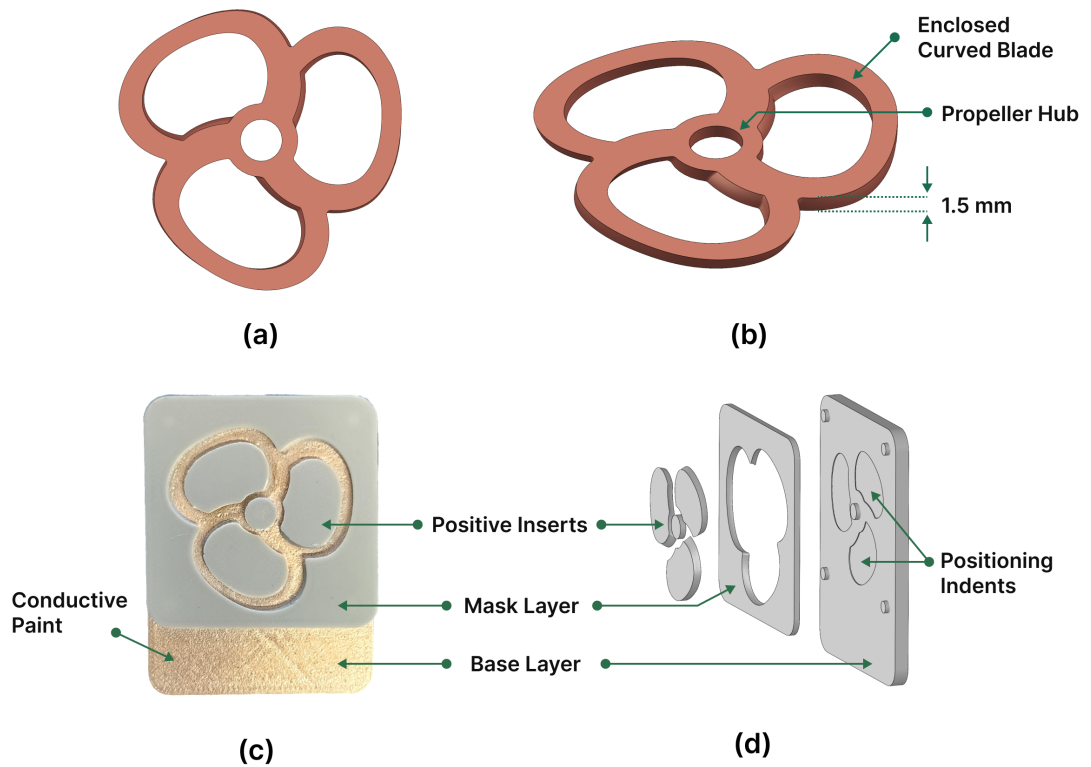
(a) and (b) CAD models illustrating the proposed design of the toroidal propeller. (c) A photograph displaying the assembled mold, and (d) a CAD model revealing an exploded view of the mold components.
